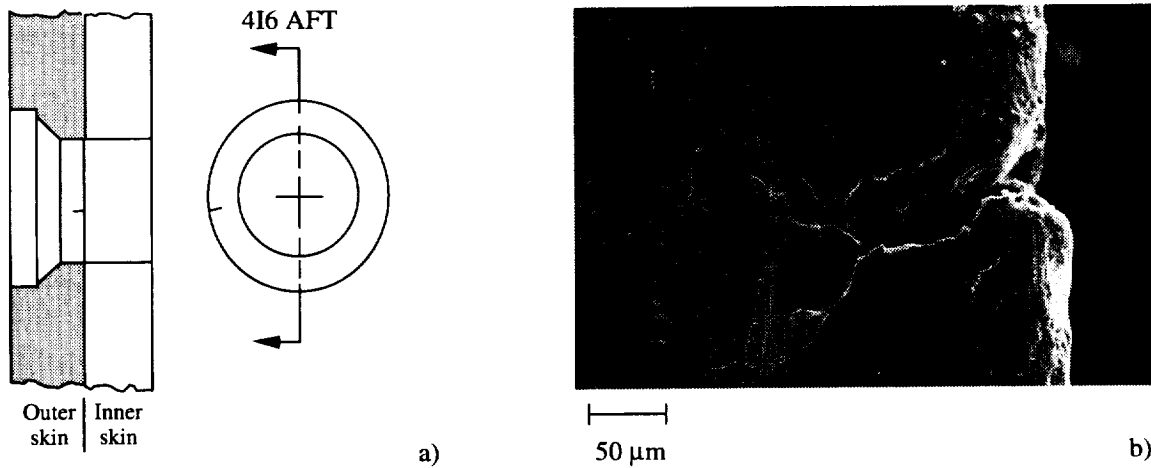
a) The schematic shows the rivet hole 4I6 configuration and the location of the outer skin fatigue crack oriented in the aft direction and below the 9 o'clock position. b) The SEM micrograph shows the small partially opened fatigue crack located at the inboard corner of the rivet hole shank region. The crack was partially opened during the destructive examination.
